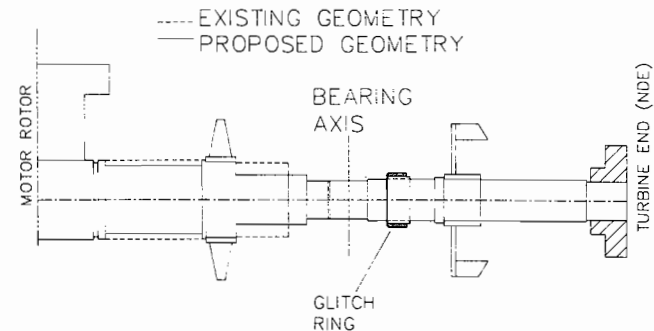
Old Vs New Motor Shaft Geometry at Turbine End (NDE).
